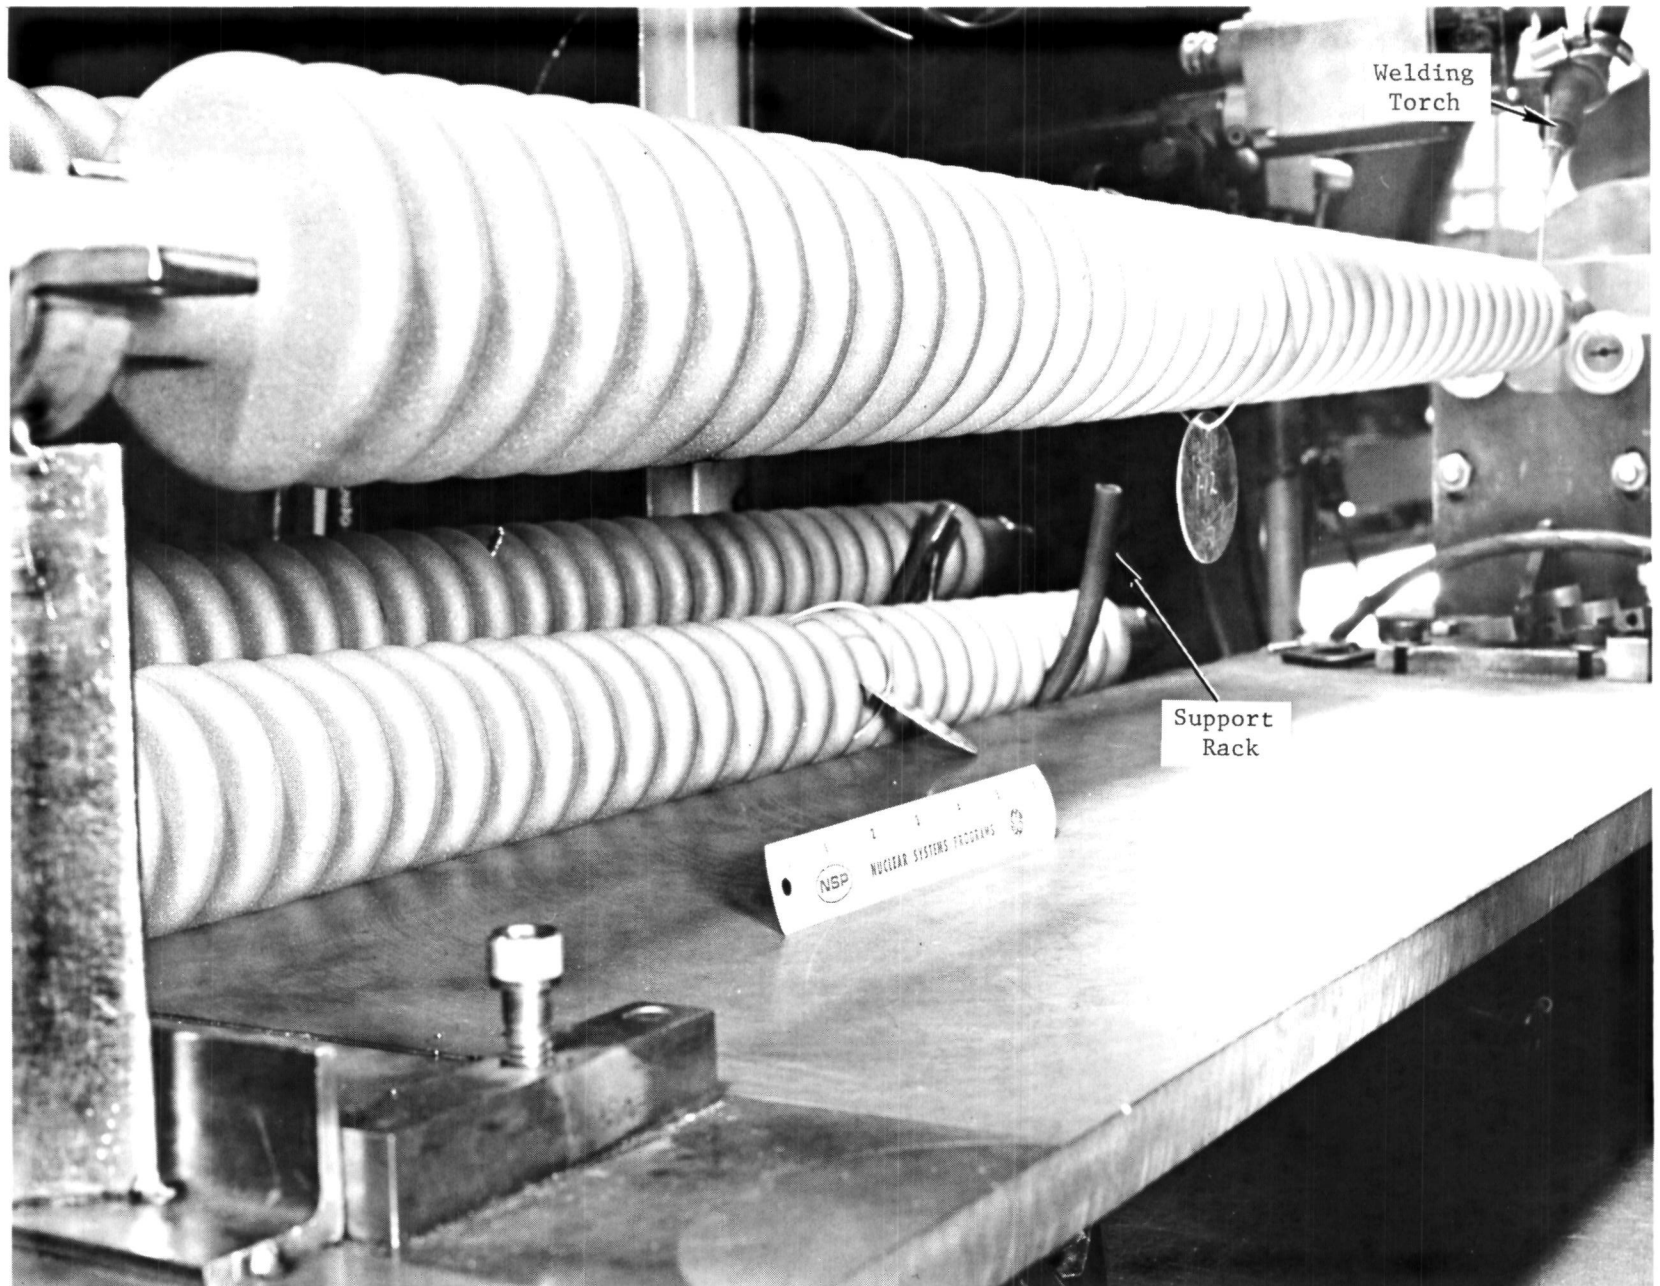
Heat Storage Tubes Loaded for Assembly Welding of Inlet Ferrules and Reducers.
